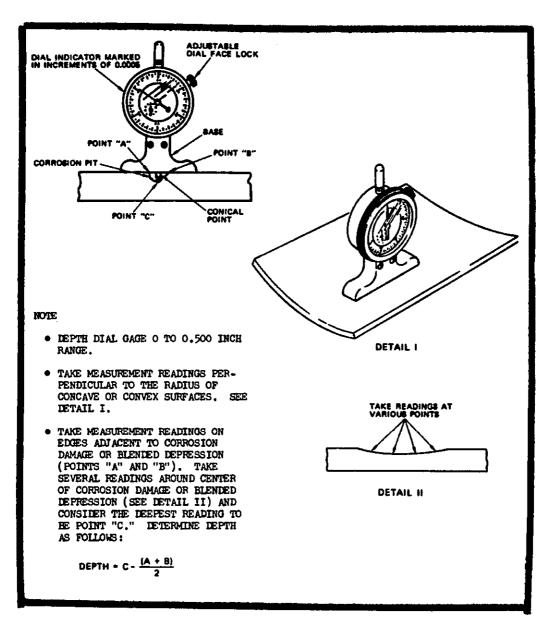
Corrosion Damage and Rework Measurement Using Depth Dial Gage.
